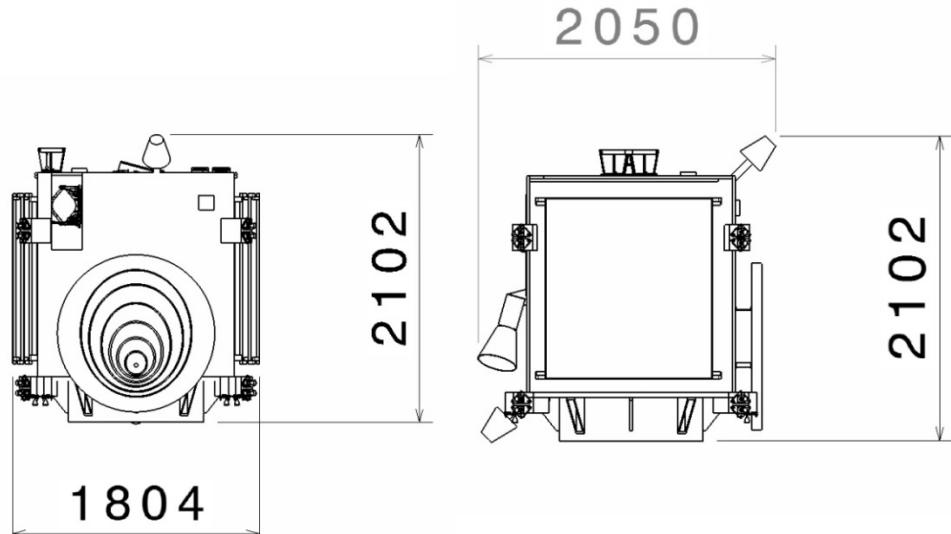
Outer dimensions for stowed AIM-3 spacecraft
